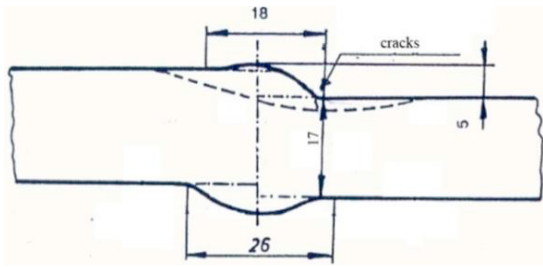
Crack print in the welded joint between lid and mantle
